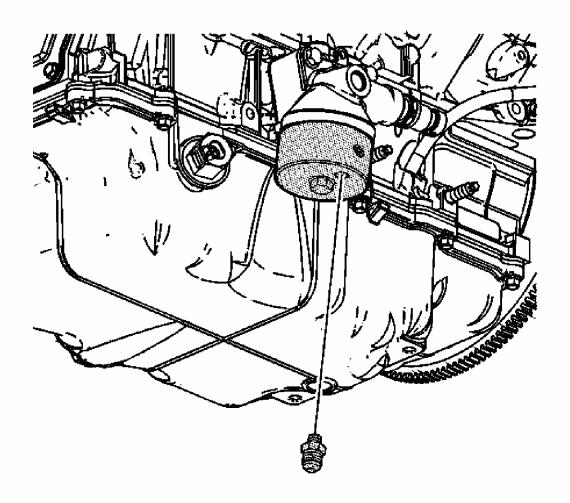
View Of 1/8 NPT Fitting Courtesy of GENERAL MOTORS CORP.
